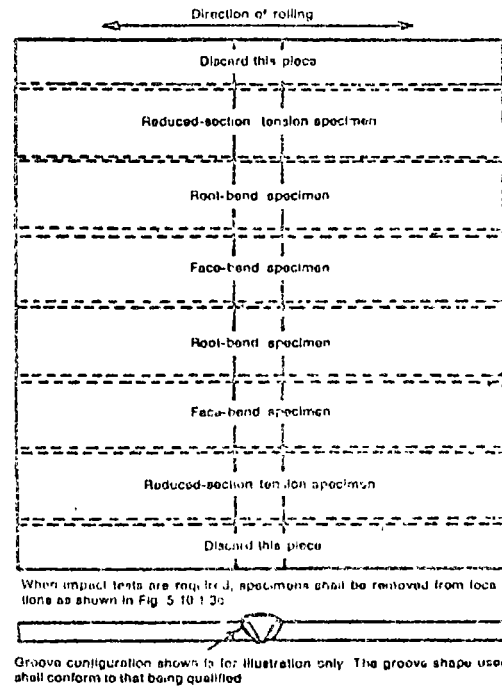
Location of test specimens on welded test plate 3/8 in. thick—procedure qualification.
